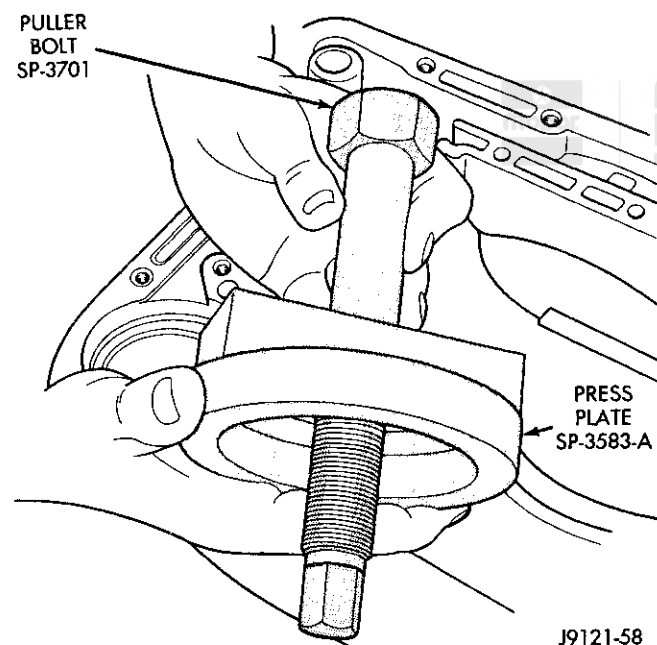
Assembling Clutch Cam Puller Bolt And Press Plate
